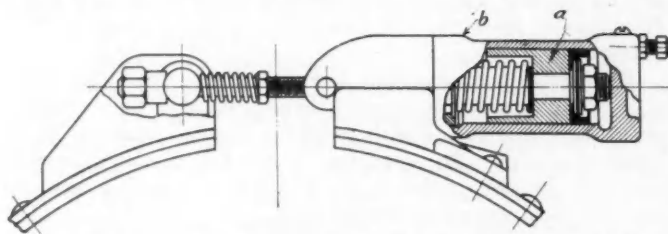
CONSTRUCTION OF THE BAND MECHANISM EMPLOYED ON A HYDRAULIC BRAKE
